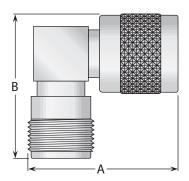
(Right angle jack-plug; connects one plug and one jack)
